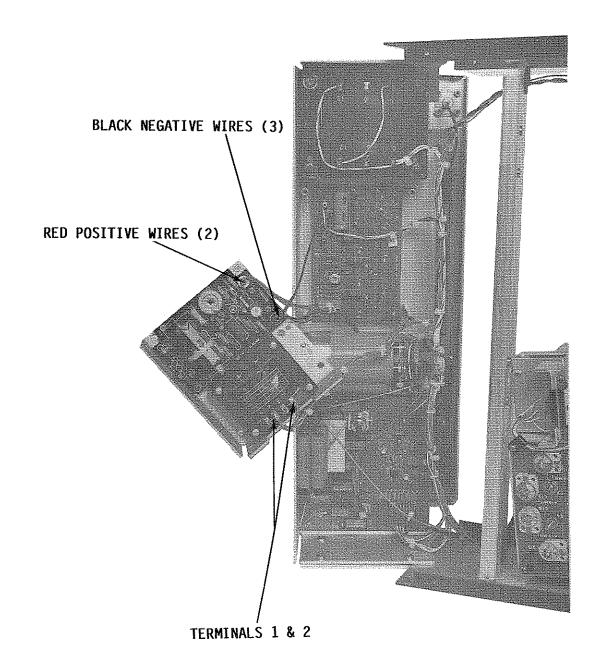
SHEET 6 of 19, 12V POWER SUPPLY DISASSEMBLY
